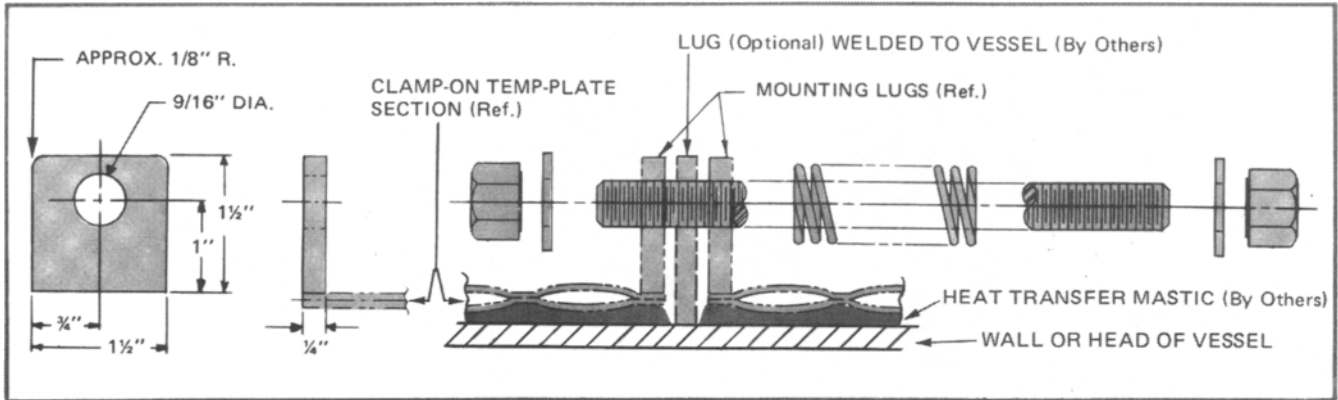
Typical heat transfer cement/mastic sealing between vessel and heat transfer plates/coils/Temp-Plates® using spring-loaded assembly. (Used by permission: Cat. TP-108-9, ©1994. Paul Mueller® Co.)
